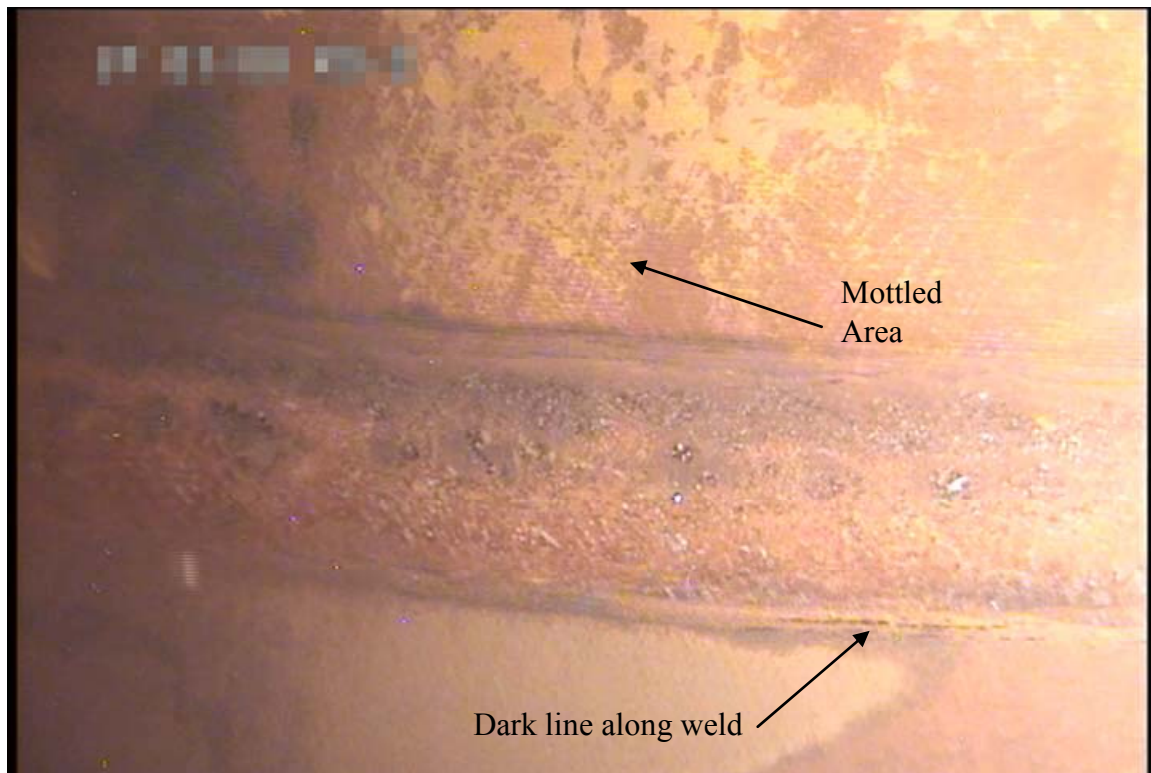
Complex Surface Deposit Layering On and Near BWR Weld
